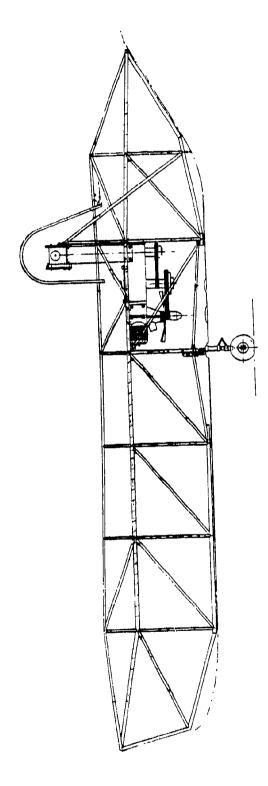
Car Frame Side View Showing Drive System Installation and Landing Gear.
